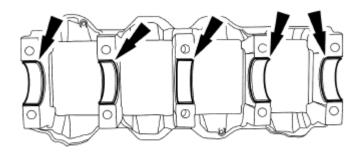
Locating Main Bearings Courtesy of FORD MOTOR CO.
